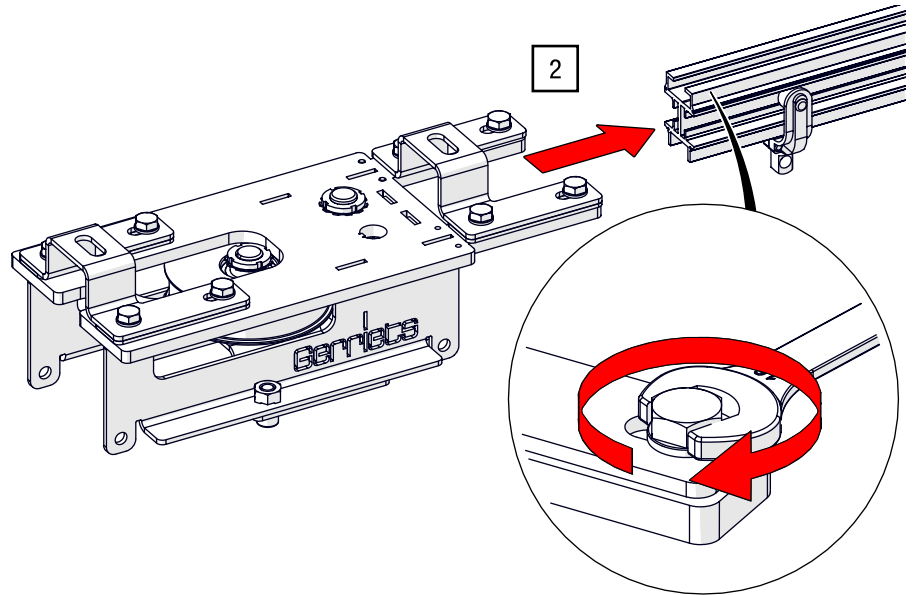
BELT-TRACK deflection unit – Install deflection unit with belt tensioner
